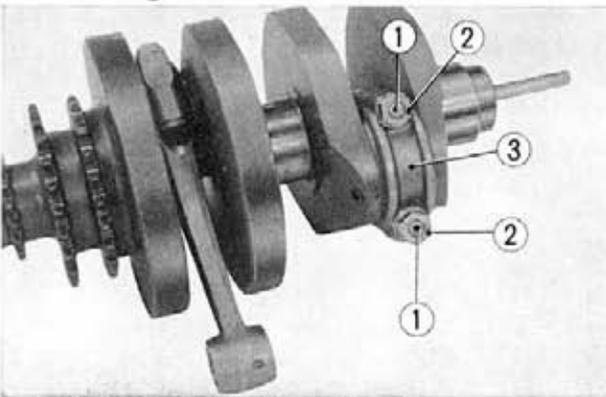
① Connecting rod bolts ② Connecting rod nuts ③ Connecting rod
